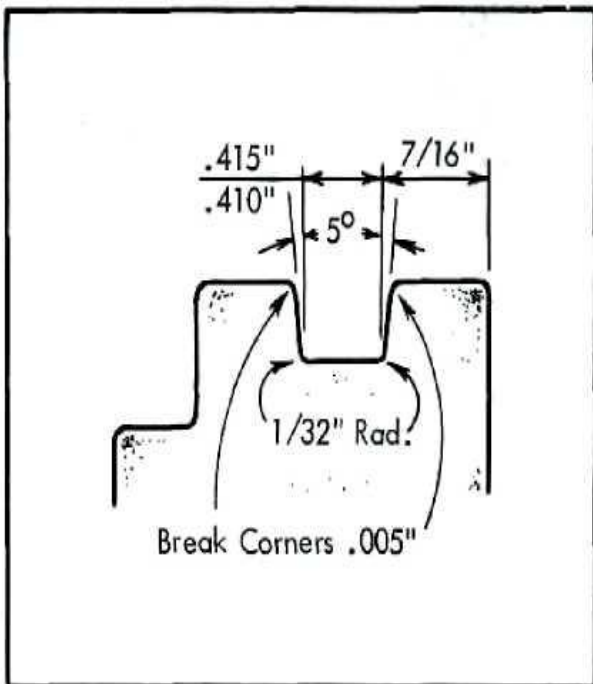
C.I.L. Aluminium Piston Rework.
